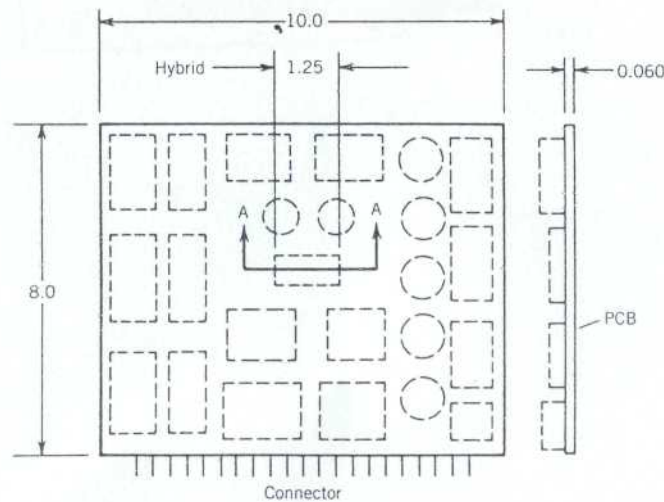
Throughhole mounted hybrid located at the center of the PCB
